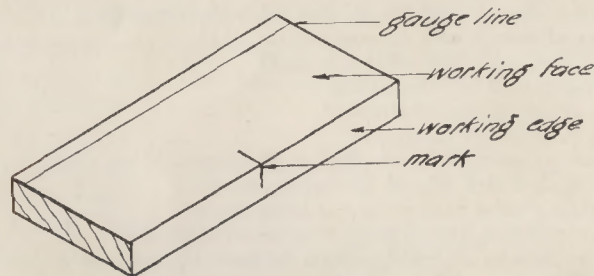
Squaring board to dimensions. Steps 1 to 3
